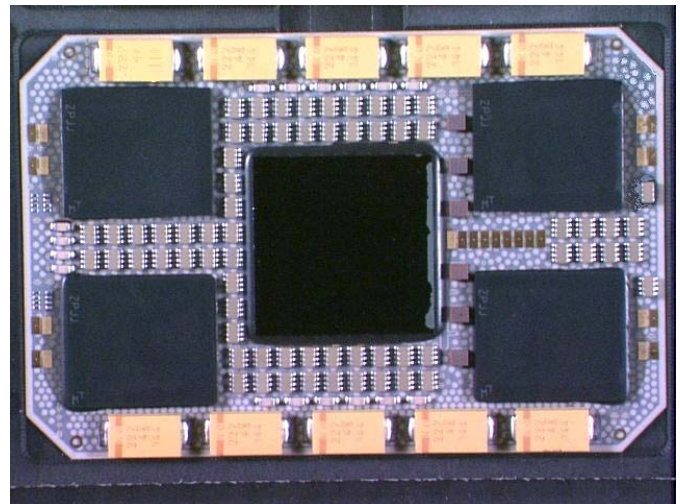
PTFE laminate in SIP format, showing topside components (lid removed) including ASIC die, 4 SRAM devices, multiple formats of passive components. Package length is 65mm.
